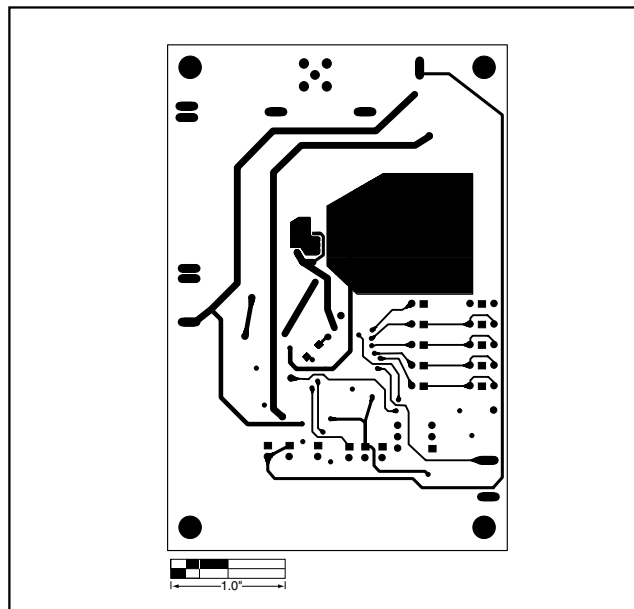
MAX1717 EV Kit PC Board Layout—Solder Side
